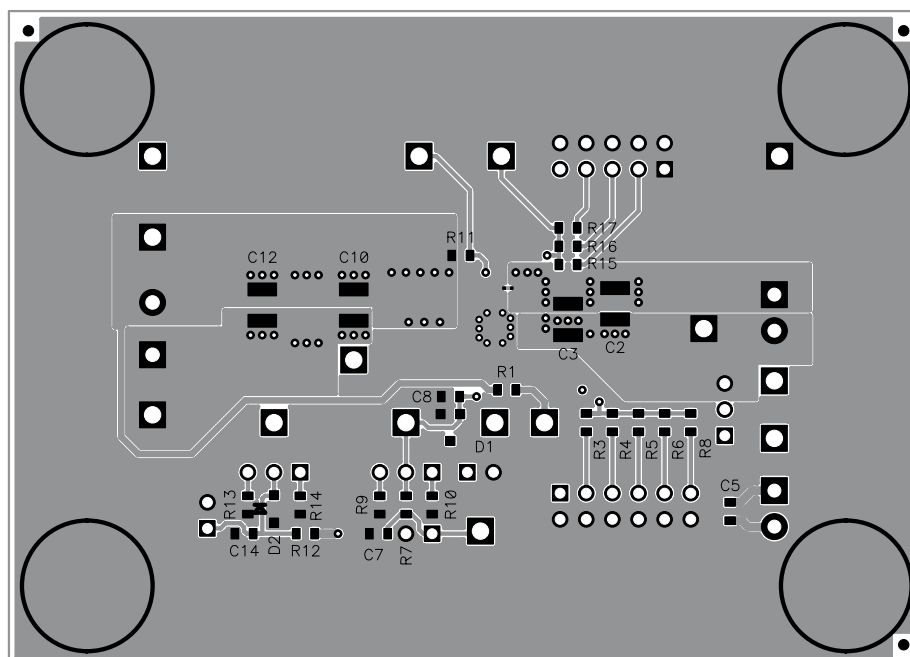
TPS84x2xEVM-692 Top-Side Layer and Assembly
